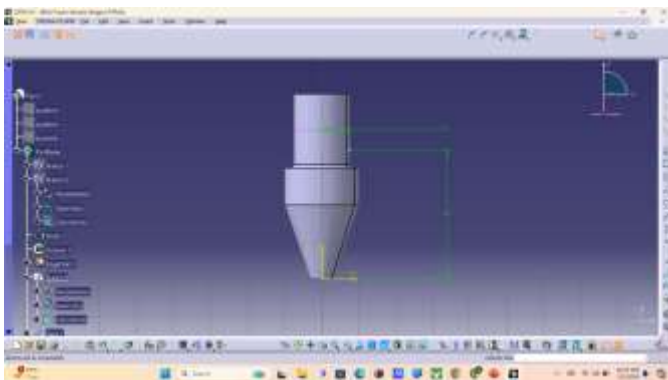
Model After Liability 360 Shaft & For Inner Part Making Groove
